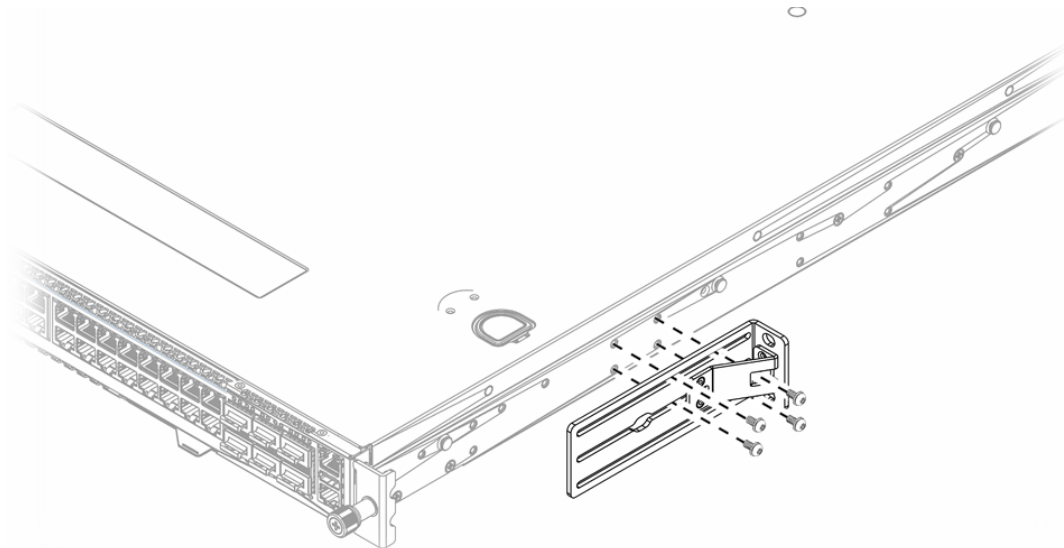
Attaching a Long Mounting Bracket: Middle of Switch
